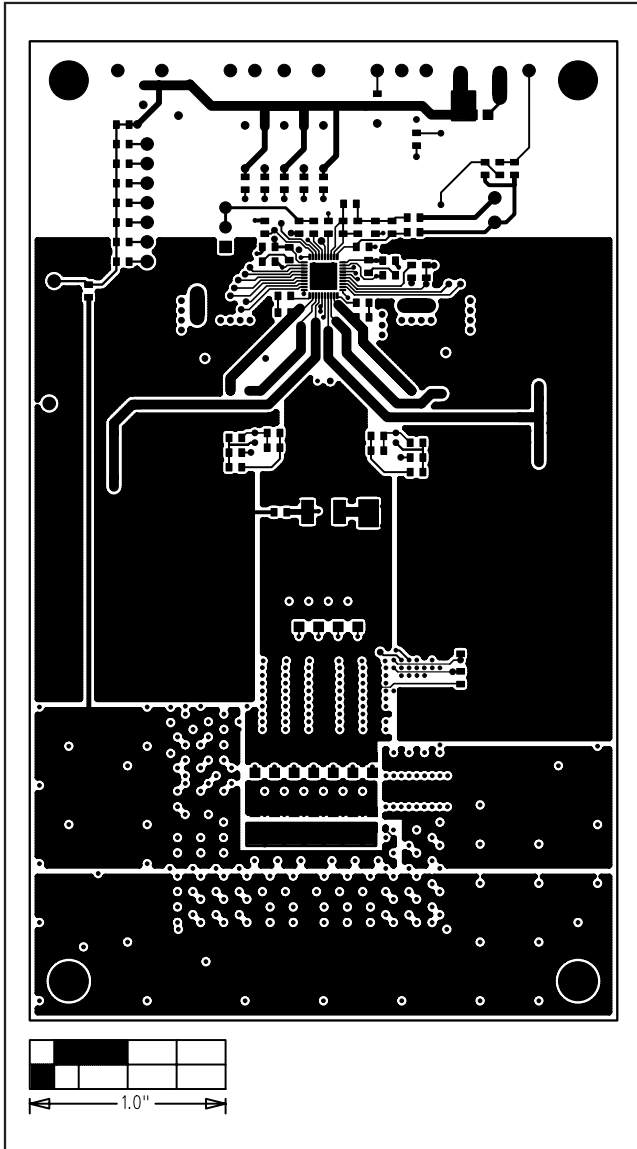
MAX17082 EV Kit PCB Layout—Solder Side
